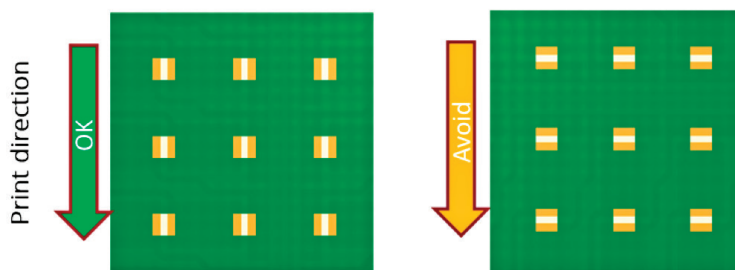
Orientate the PCB such that the stencil printing direction is along the long side of the pads
